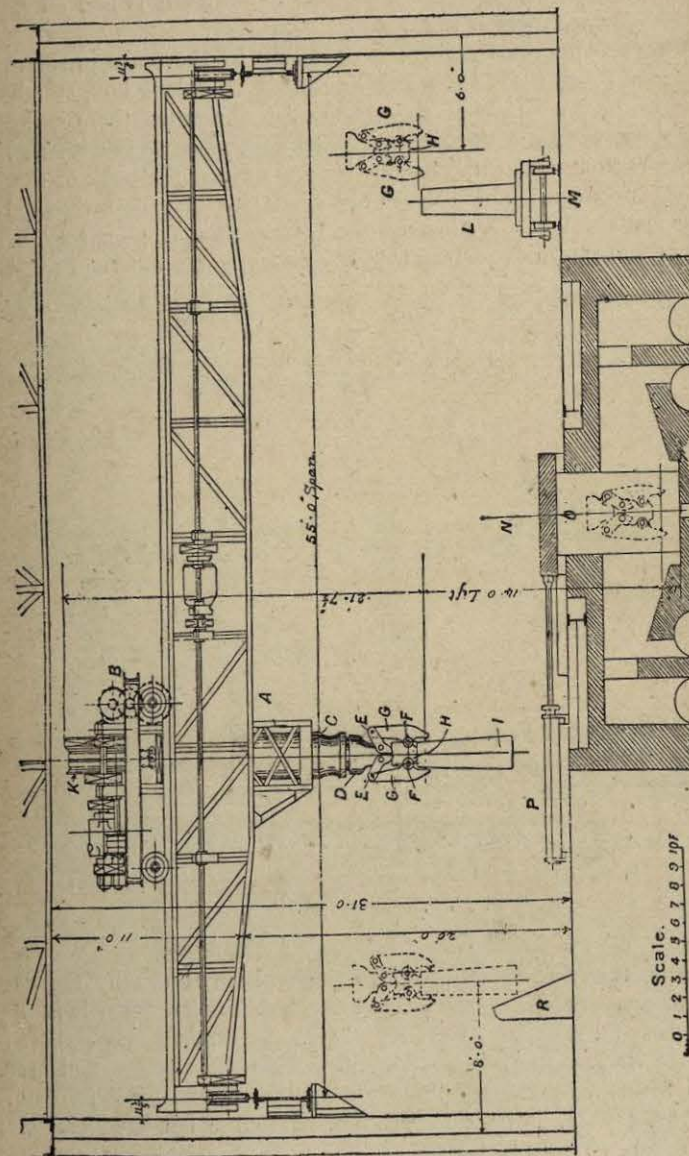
Wellman-Seaver Overhead Electric Charging Crane for Vertical Heating Furnaces.
